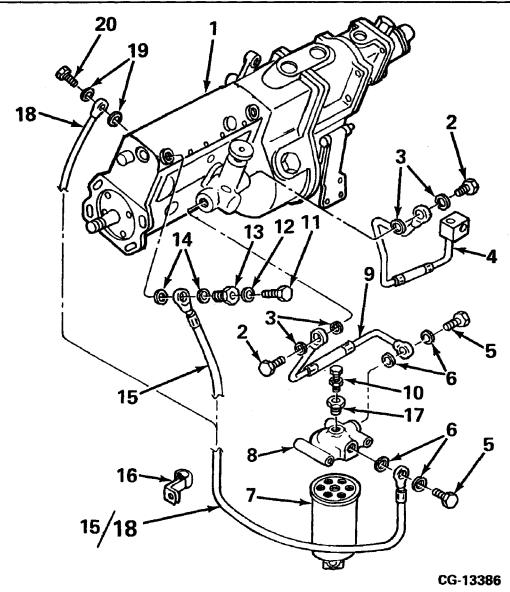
Typical Fuel Filter and Injection Pump Piping w/ Pressure Side Filtering (Model A or MW Injection Pump)
